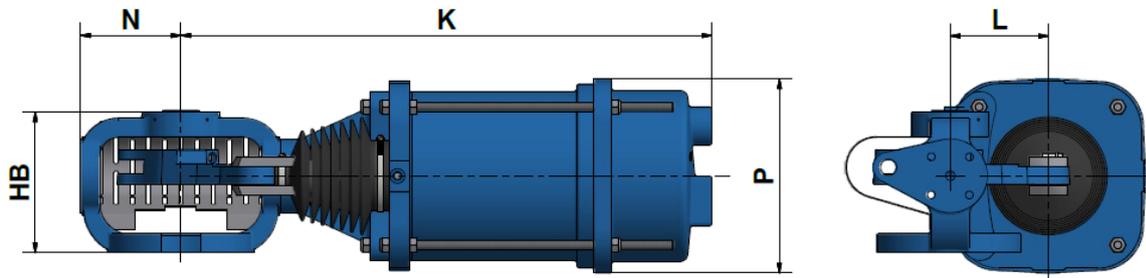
Dimensional drawing for Type R Actuators with VETEC bracket
